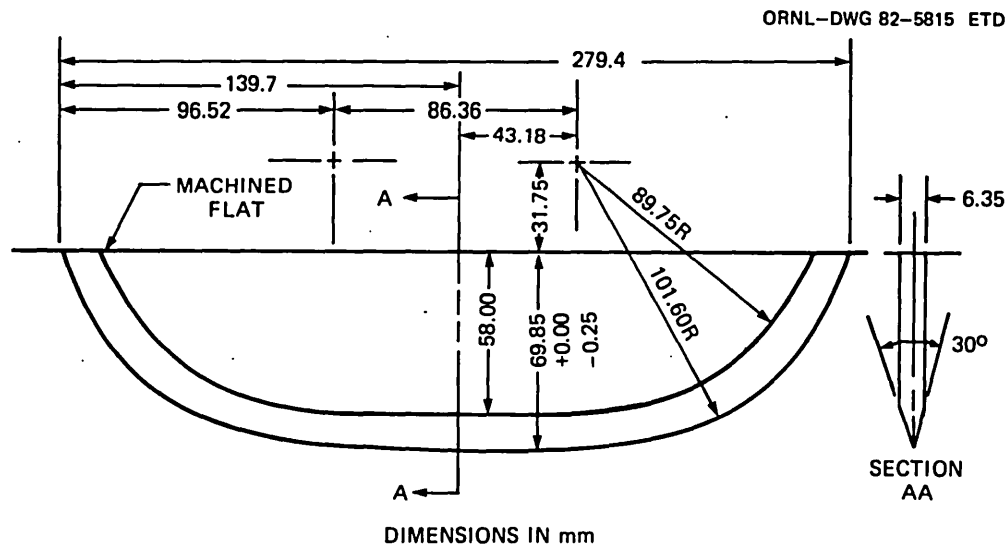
Sectional view of a radial-axial plane of the vessel that shows the configuration of the V-8A machined notch.
